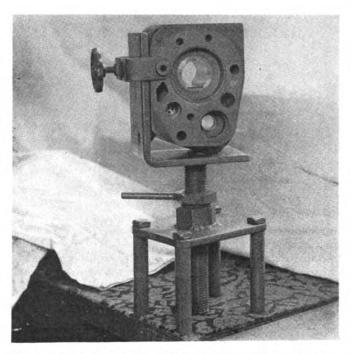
Stand and clamp for holding AB valve portions while doing repair work
